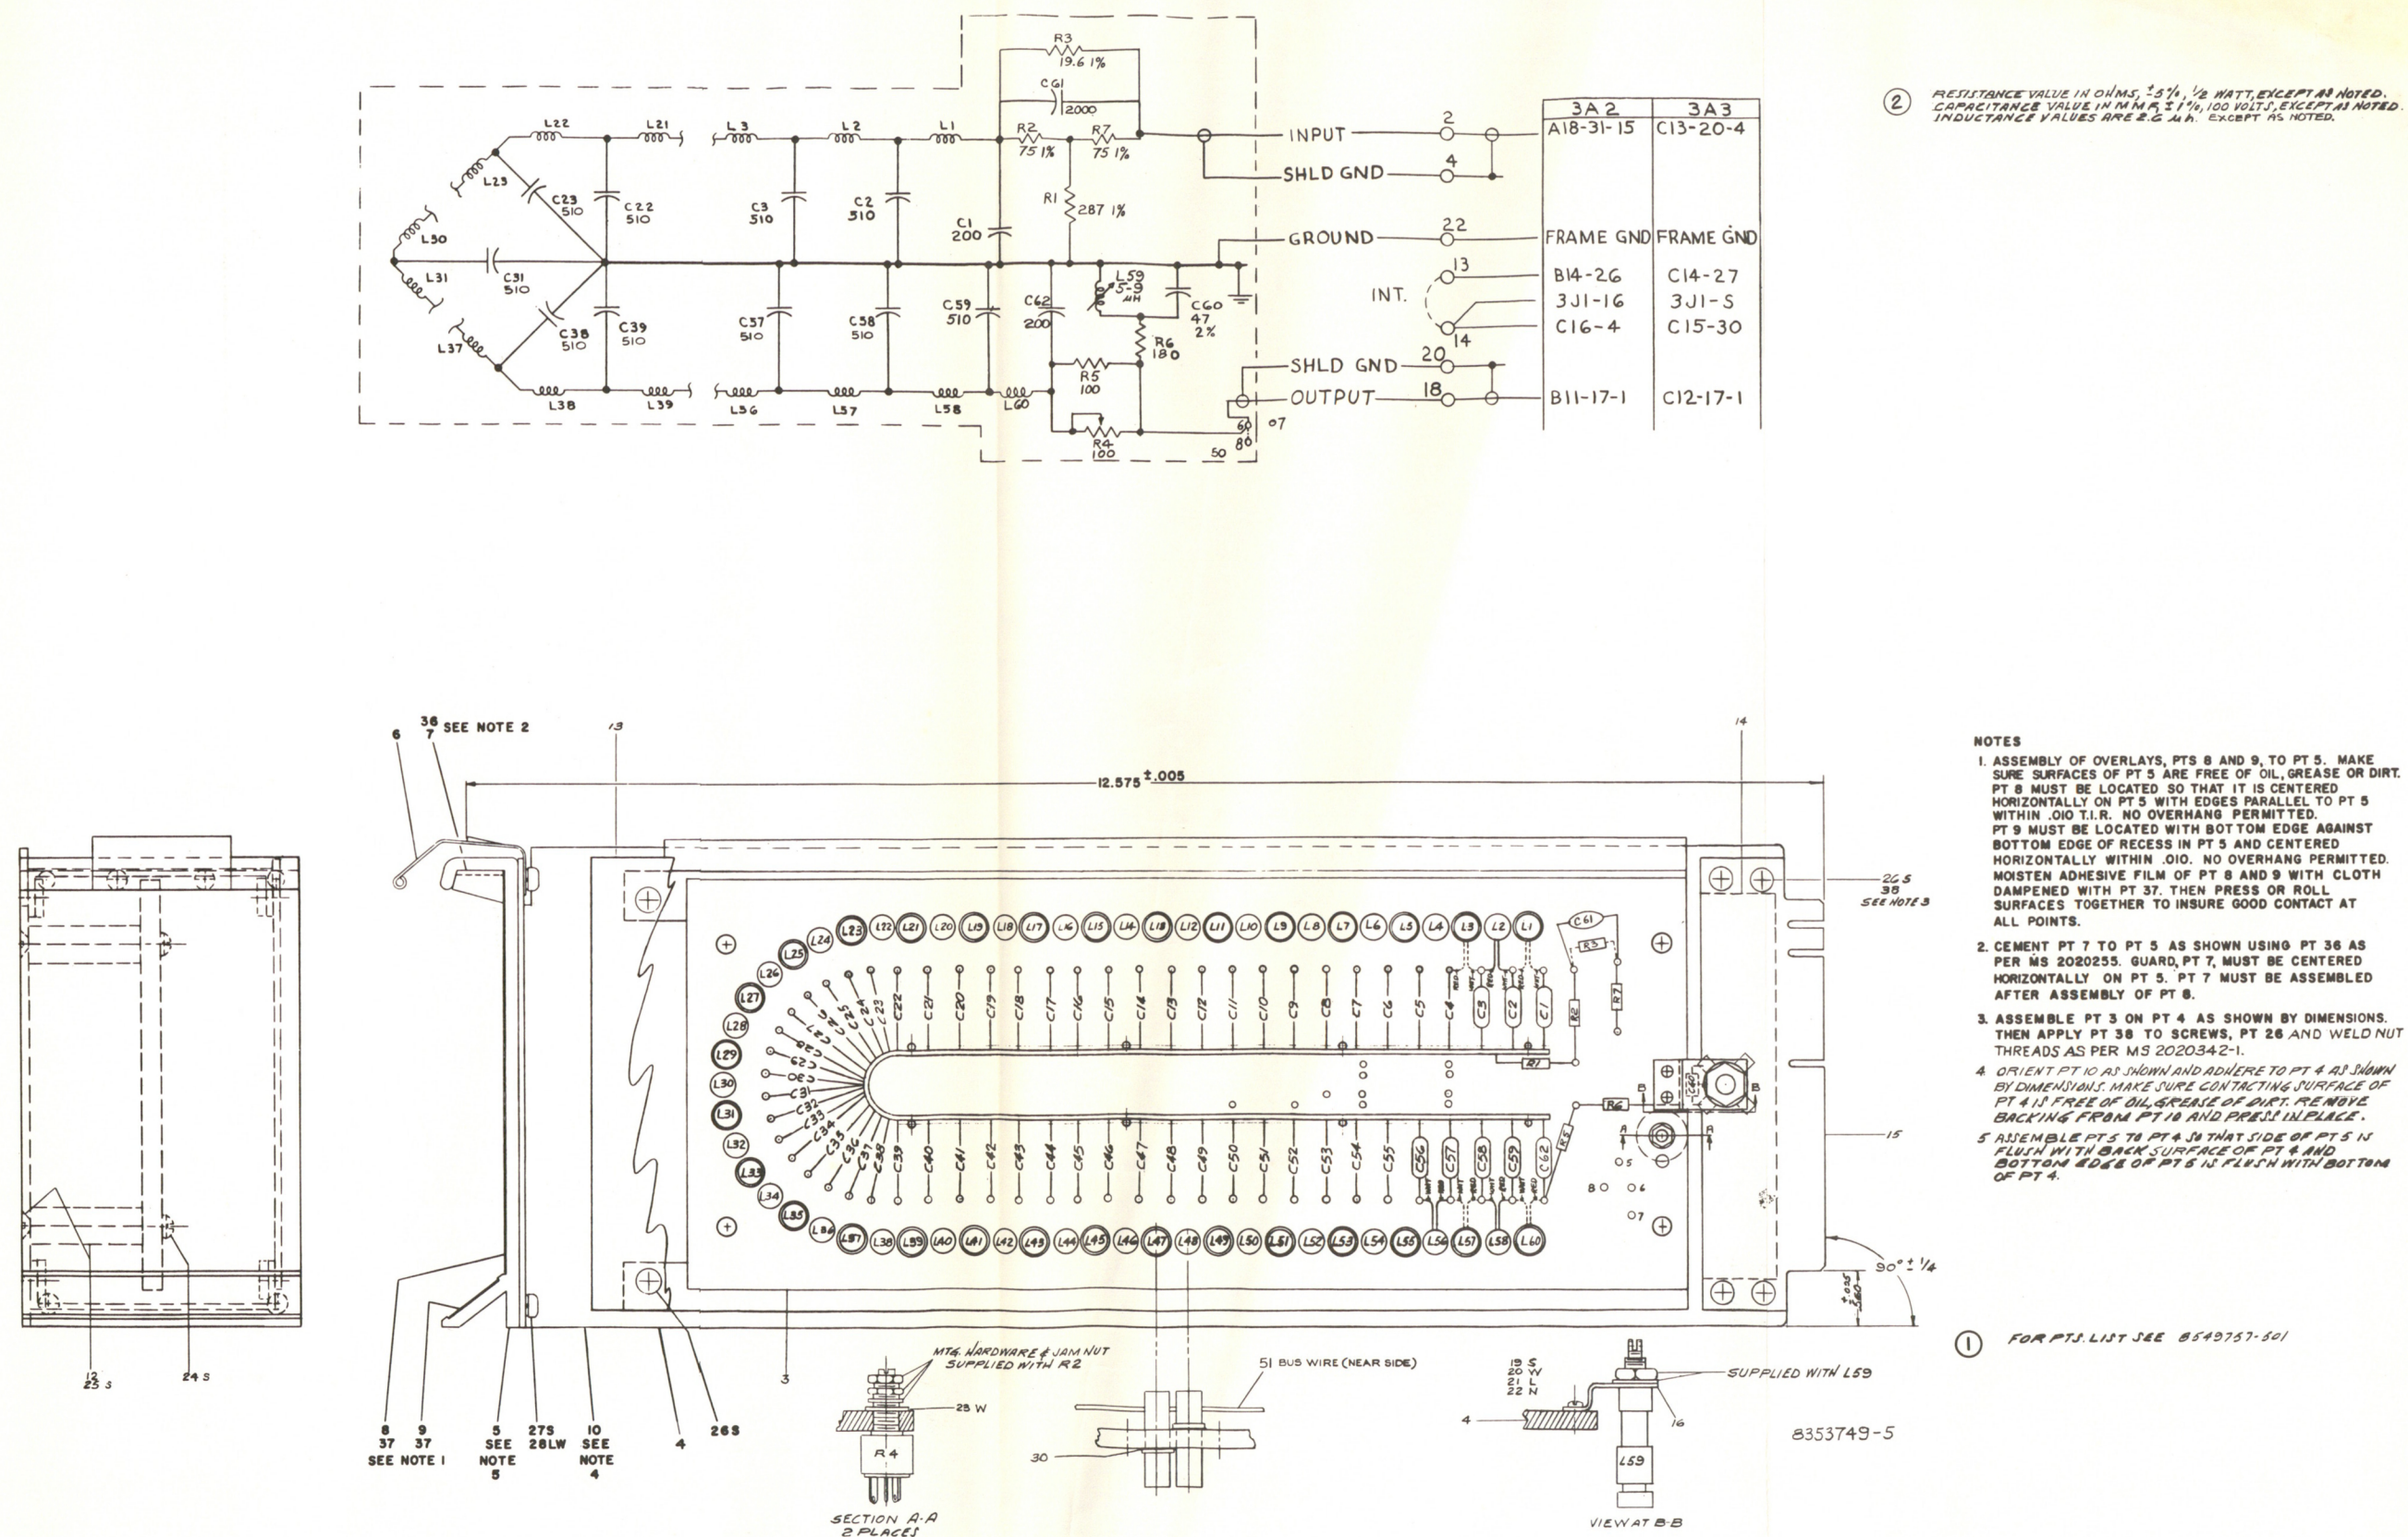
Fixed Delay Line Module Schematic and Assembly Diagram for TR-3/TR-4 Machines
